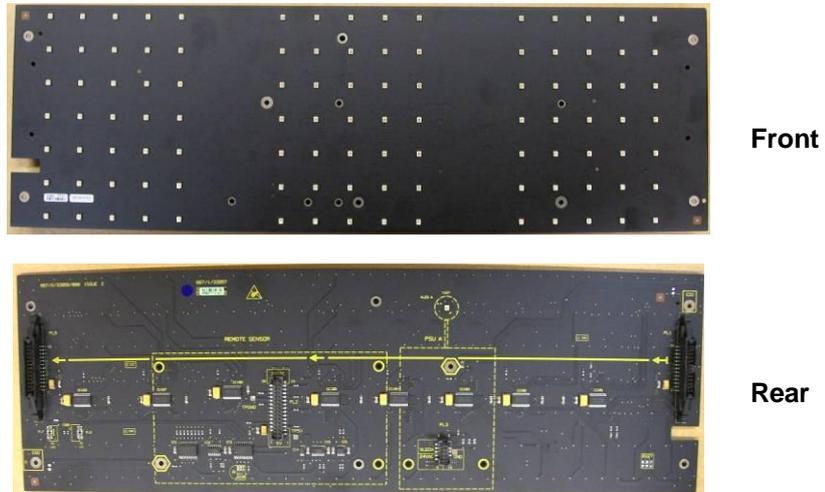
160mm Character PCB Assembly (Yellow) 5 x 7 Matrix
